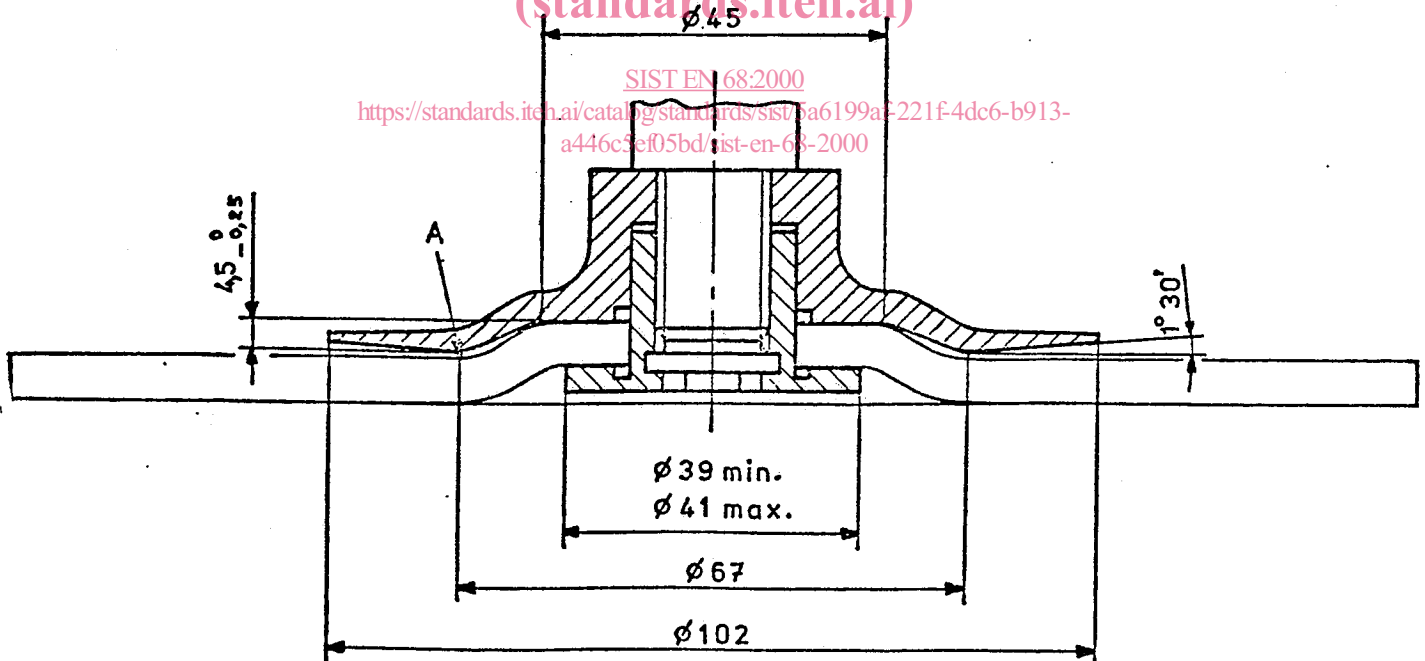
Special flange assembly for depressed-centre wheels of 180 mm diameter and larger.
